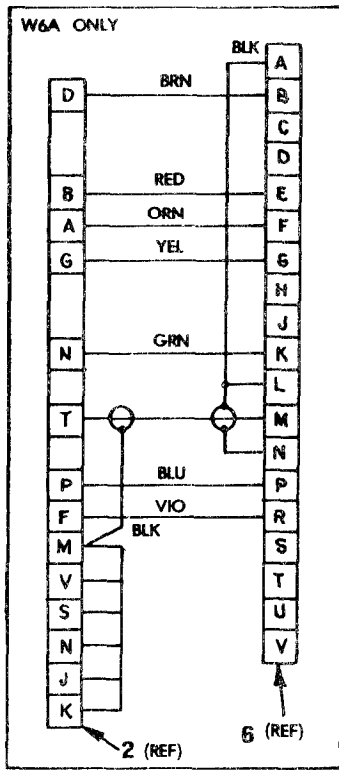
Adapter cable assembly, W6A (467-106-001) W6B (467-107-001) W7A (467-108-001) W7B (467-109-001) W8A (467-110-001) and W8B (467-111-001) (sheet 2 of 2)
